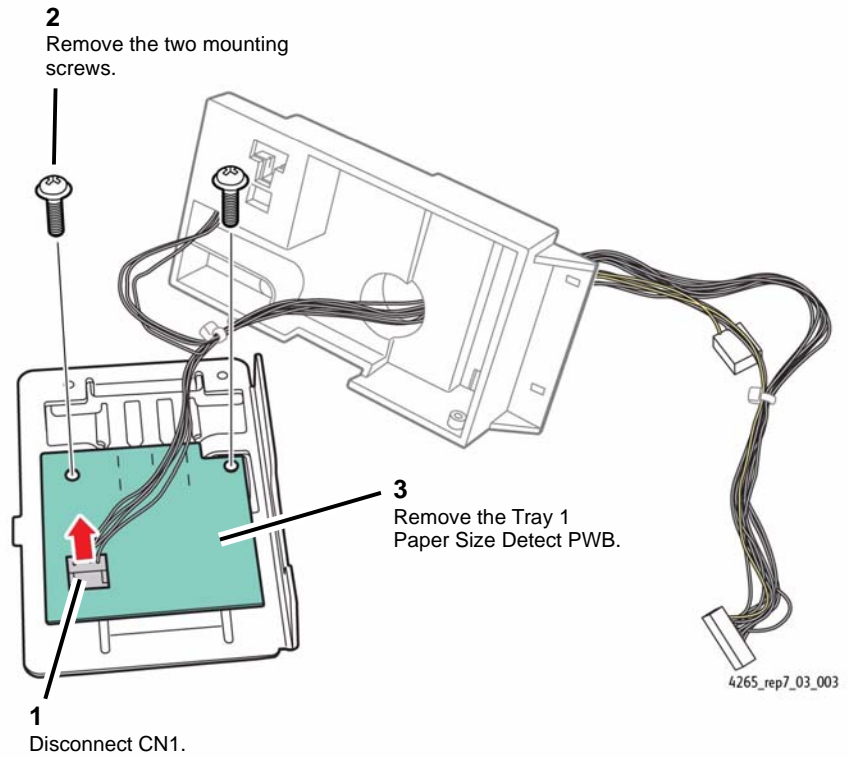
Removing the Tray 1 Paper Size Detect PWB
